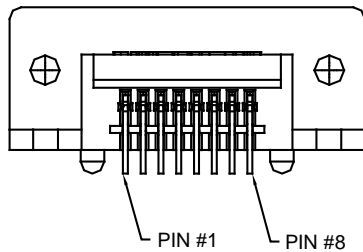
SR4210PCB Board-Mount Receptacle Dimensions
